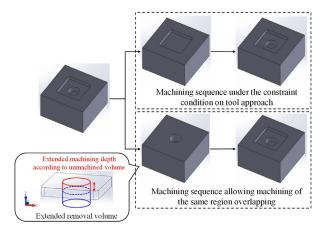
Machining sequence for flexibility and expanded removal volume according to machining sequence.
